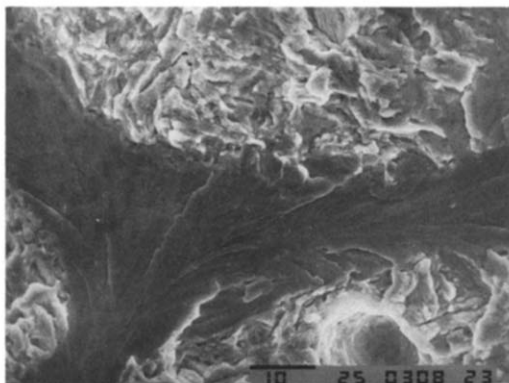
Fractographic aspect of corrosion fatigue of CA 15, a martensitic stainless steel containing approximately 10% of δ -ferrite, tested in white water [26]. Accelerated cracking is obtained in the ferrite, accompanied by cleavagelike facets and brittle striations; finely spaced ductile striations are obtained in the martensite. The cracking in the ferrite proceeds ahead of the macroscopic crack front and facilitates, at the interphase boundaries, the initiation of cracking in the martensite.
